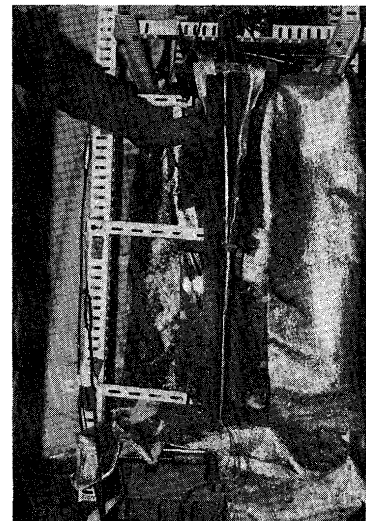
Deformation just after Finish of Welding of No. 1 Weld Line. (Case 2, Specimen S-2)
